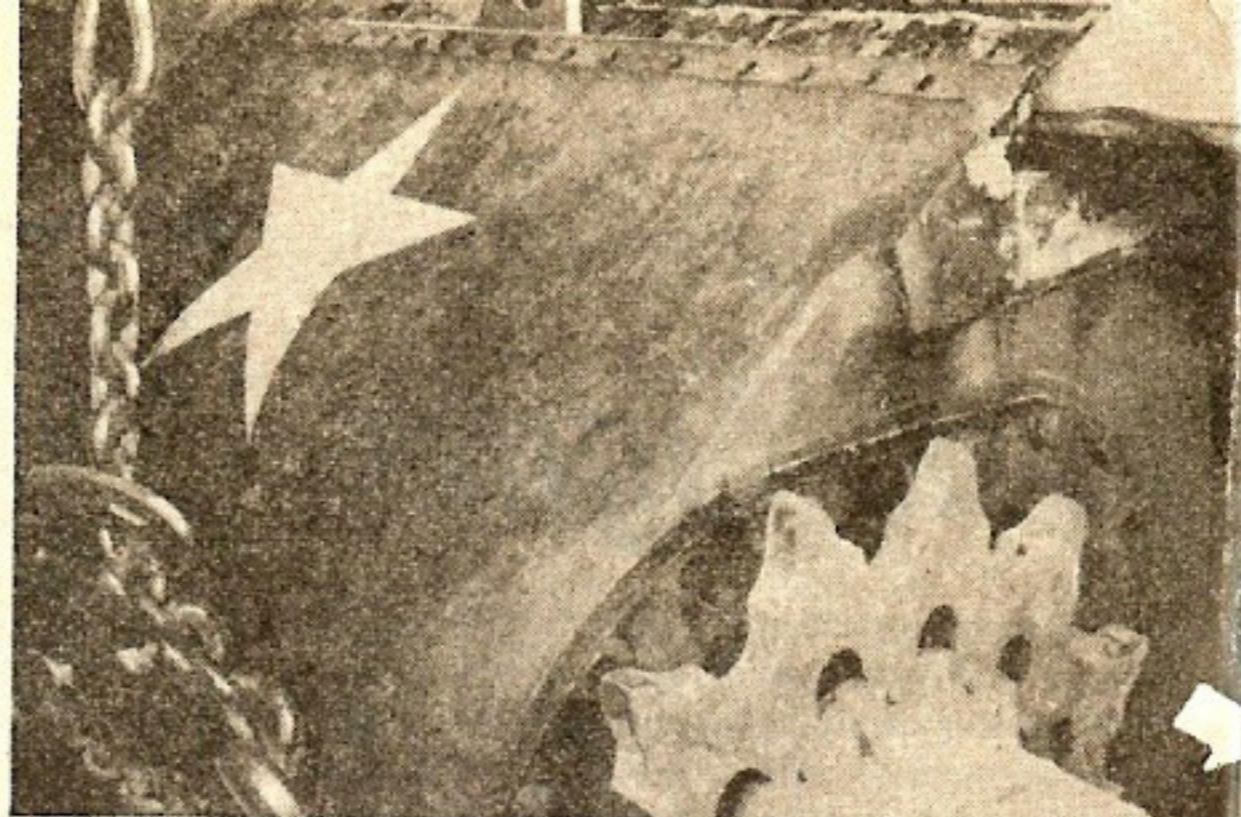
Using the rear winch, let the final drive down enough so you can install the eye in the three center bolt holes (above) using three of the bolts from the housing. Run the hook from the wrecker boom through the eye. Tighten it up so that the final drive is now supported by the boom hook and rear winch line. Arrow indicates cigar.
